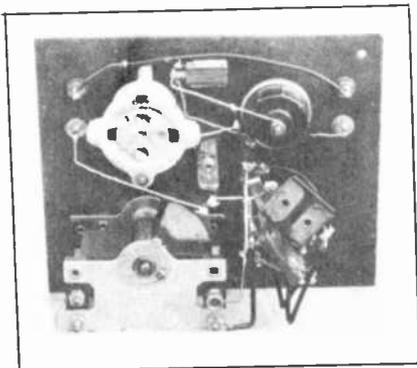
Fig. B. Rear view of the unit showing how the components are mounted vertically behind the front panel.
